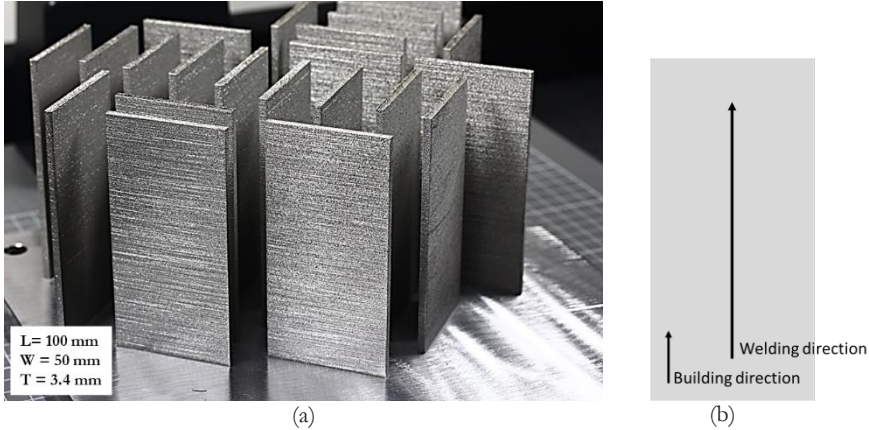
(a) Substrate plate with weldability test specimens after the L-PBF-process, and (b) the building direction and welding direction on the specimen.
